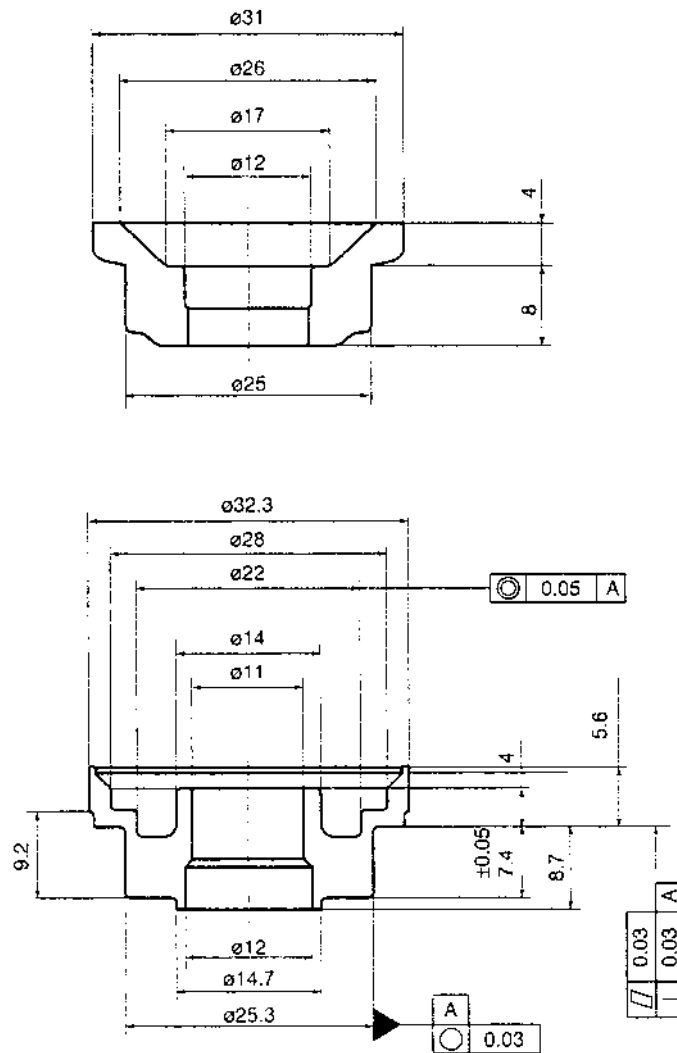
Drawing of hub for personal computer. Top: Pre-forming; Bottom: Drawing for forging.
